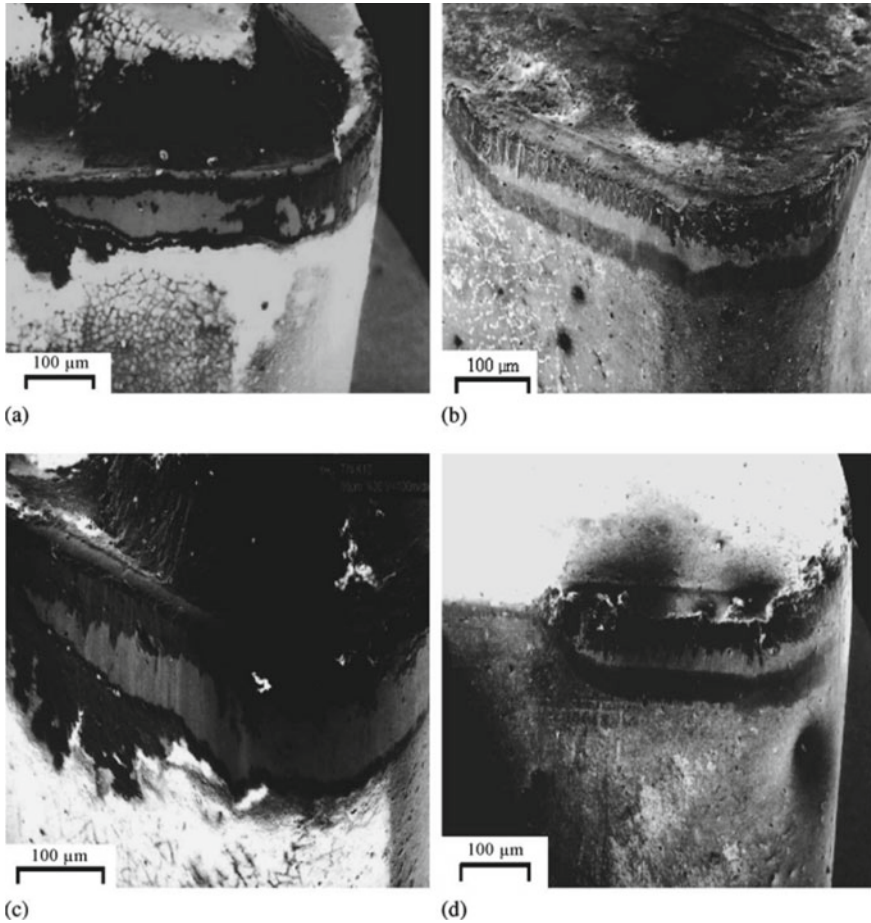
Flank wear of coated carbide cutting tools when machining of the 20 wt% Al_2O_3 particle-reinforced composites [19]
